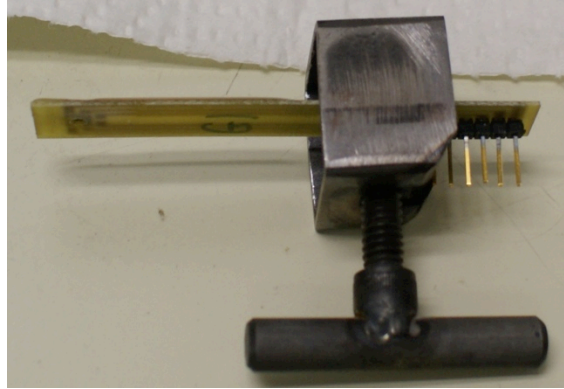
Sensor G1 Placed Inside the Piece Holder
